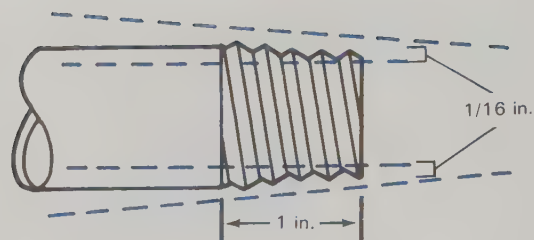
Pipe thread slopes or tapers 1/16 in. for every inch of length. This helps form a tight seal between the fitting and the pipe.
